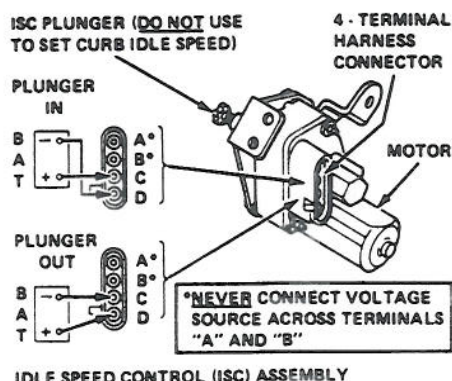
Idle Speed Control (ISC) motor test connections. E2SE carburetor
